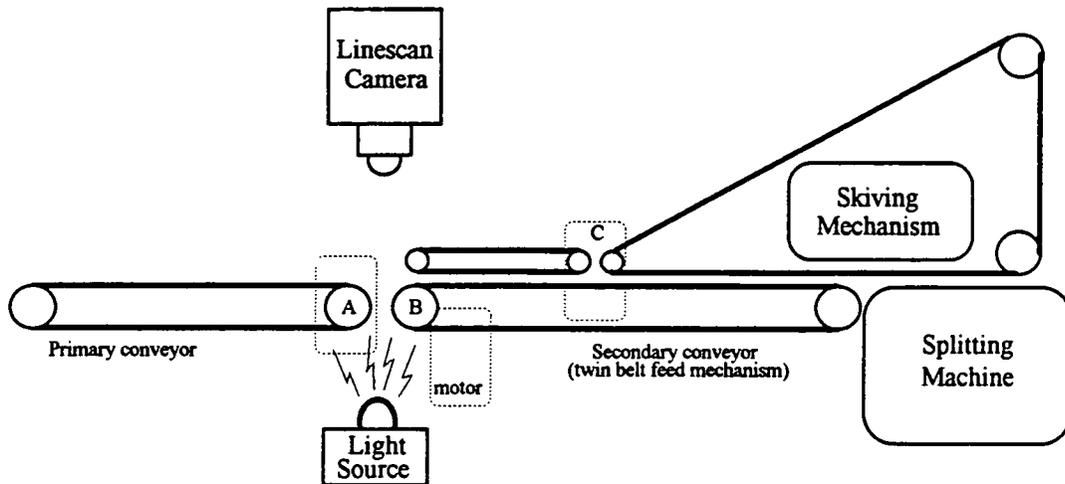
The main elements forming the mechanical assembly of the automated skiving machine
